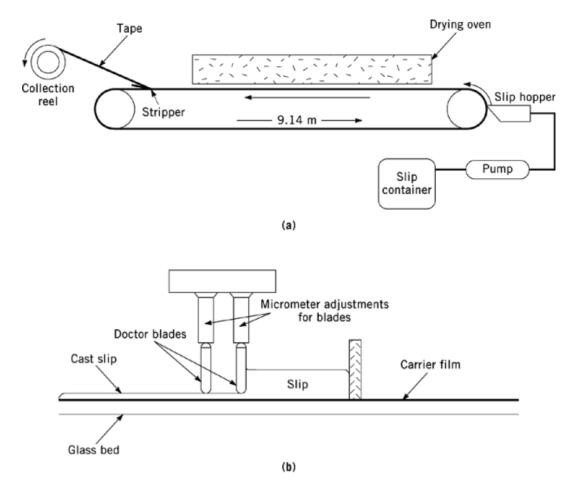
Schematic of methods for MLC manufacturing; (a) belt casting; (b) carrier film casting using a doctor blade.
